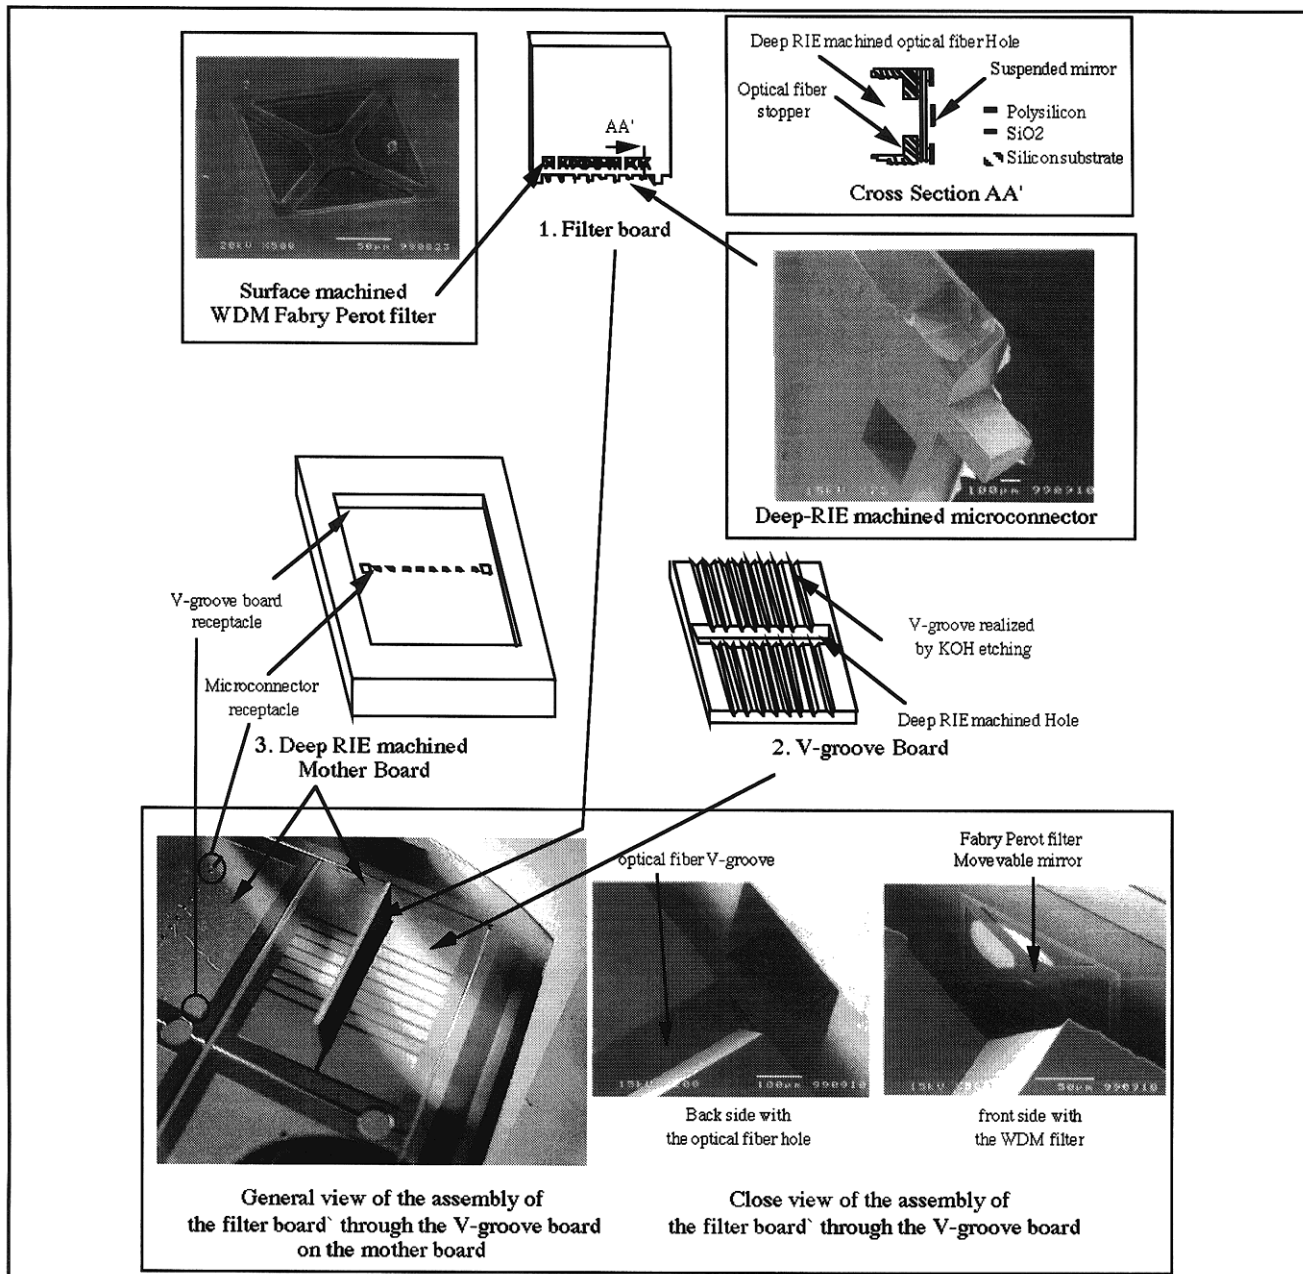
Figure I: Design and assembly of the 3 Dimensional Microsystem.
